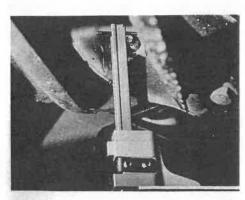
Roll Pin (end of scale) used to mount gauge to lower control arm mounting bolt in front section.
